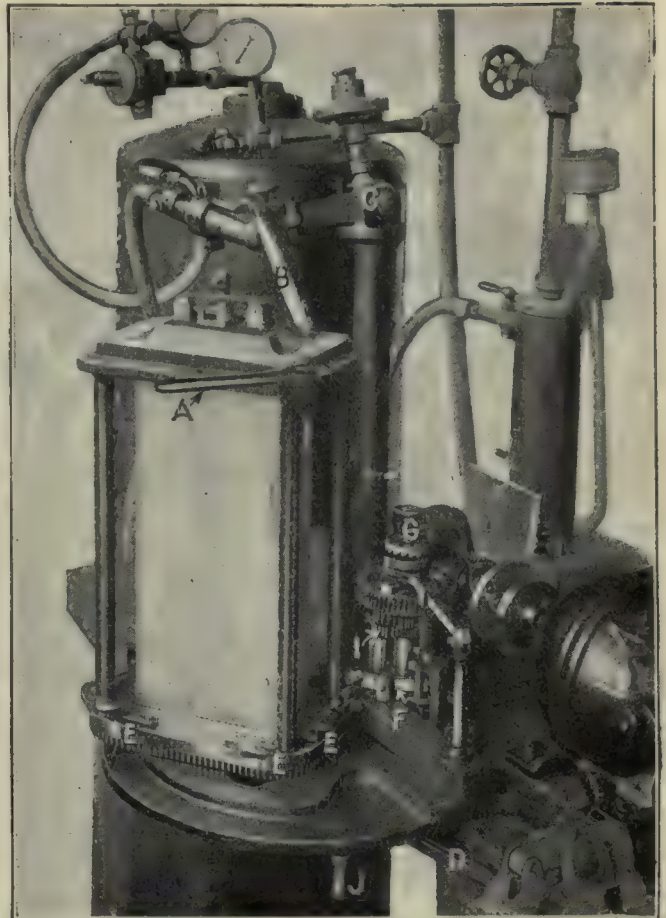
MACHINE FOR WELDING OBLONG SEAMS
